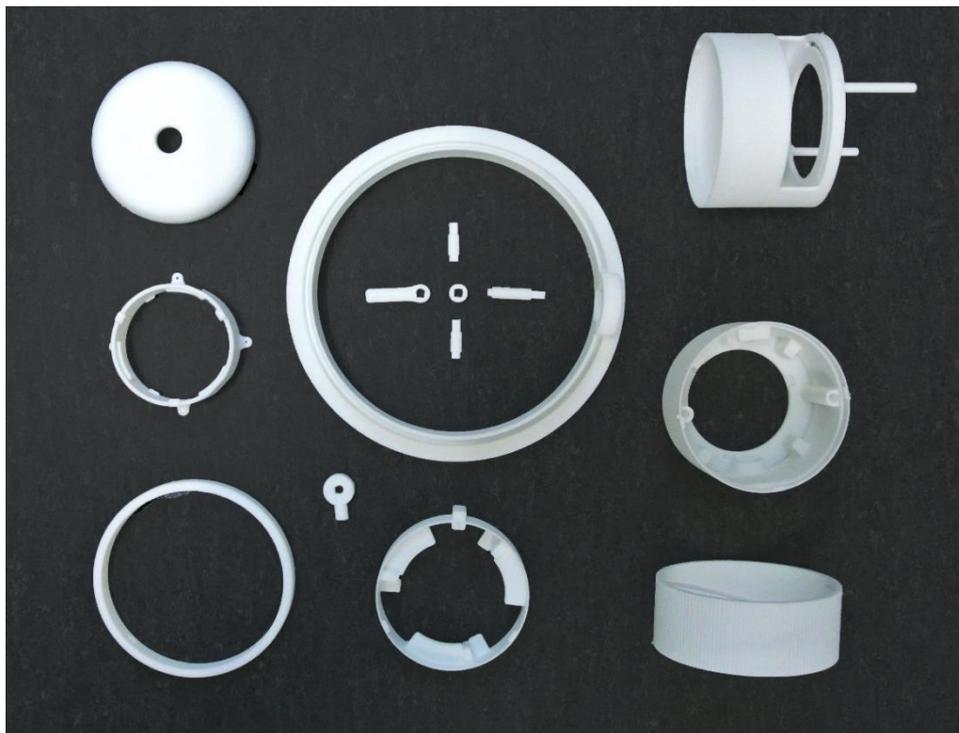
All the parts for the 3D-printed prototype of the light module.
